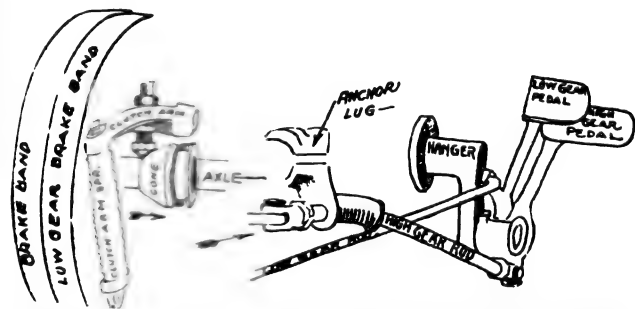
The cone is out and the clutch arm drawn down toward the axle, expanding the clutch.
